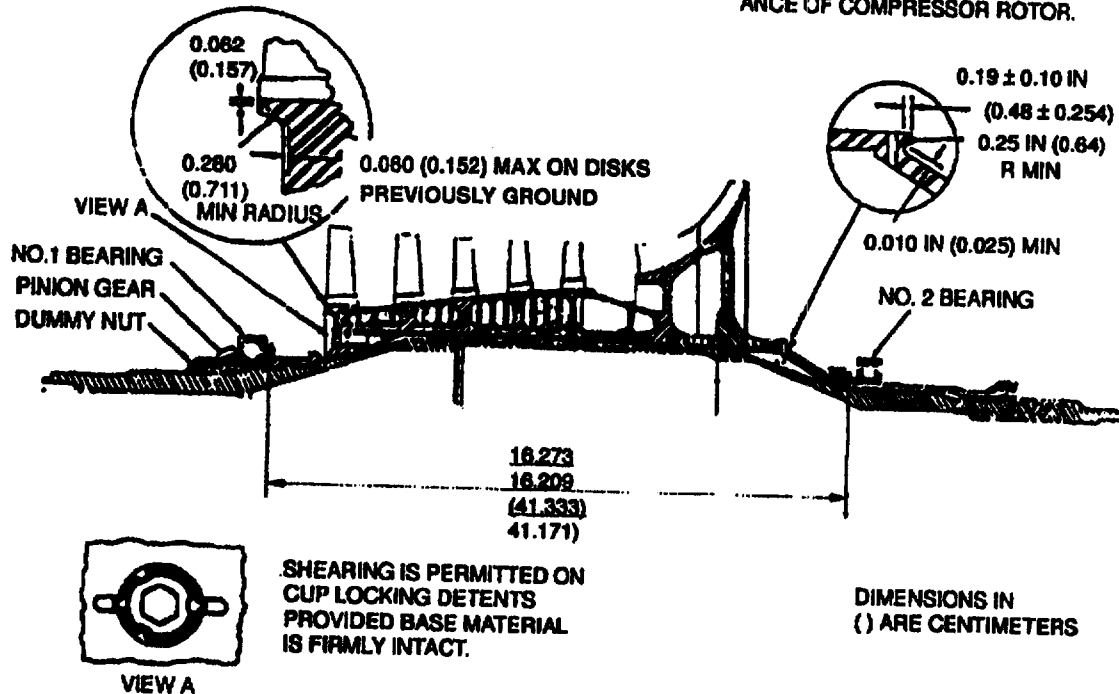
Compressor Rotor Length Dimension and Stock Removal Areas.
